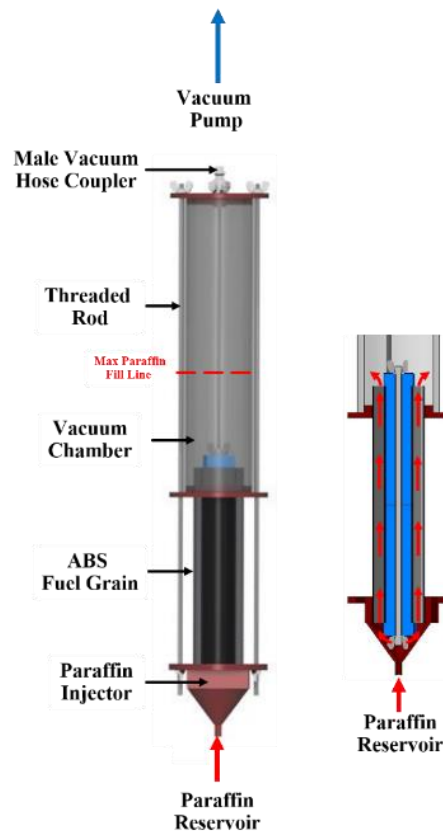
3D CAD Drawing of the Second Generation Fuel ABS/Paraffin Casting System
